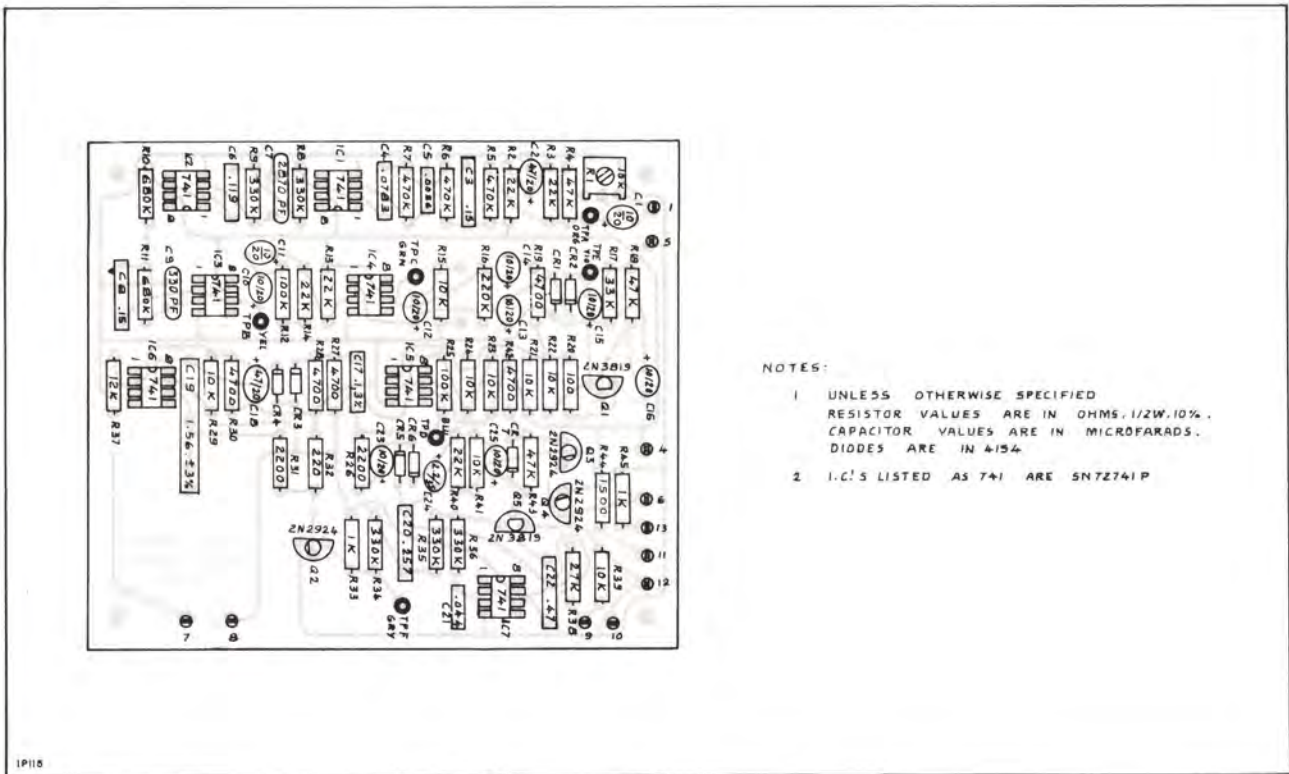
SU Subaudible Metering Demodulator, Parts Location
